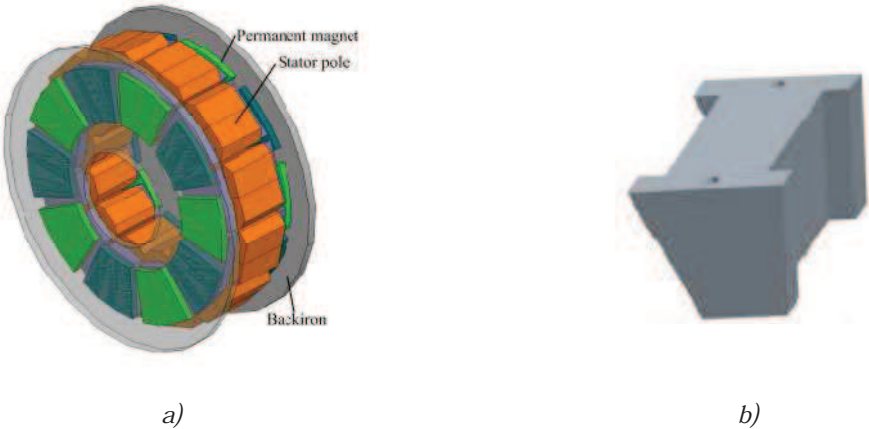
N-S prototype[40] a) the whole machine and b) detail of a stator pole
